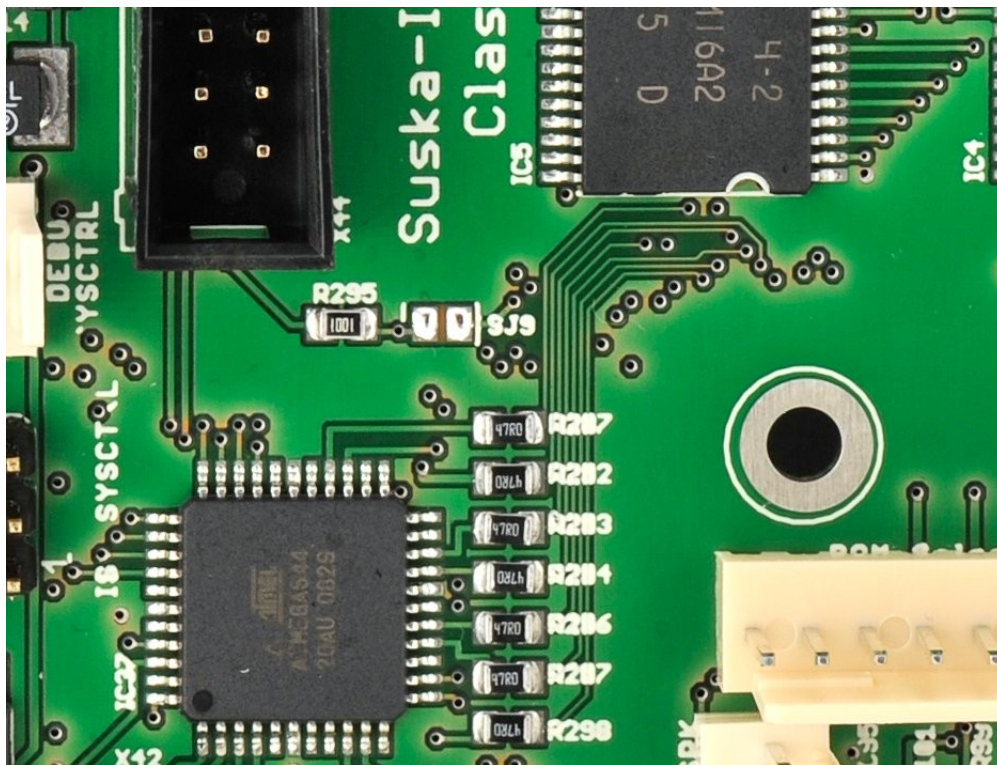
Solder Pad SJ9 on the PCB's Top Side.
